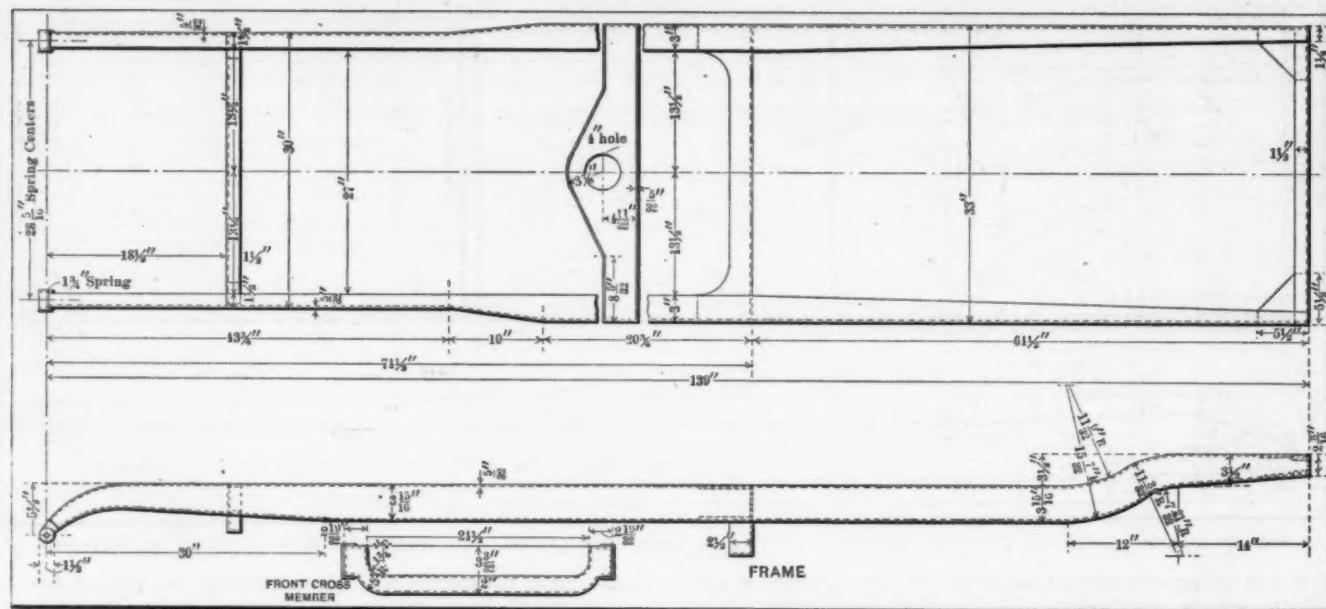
Moon 30 frame in plan and elevation, showing straight front, rear kick-up, drop cross members, and stability.
